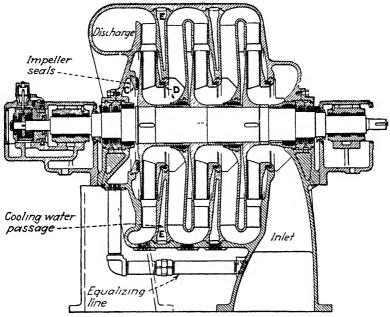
Multistage water-cooled unit with balancer seal on last stage impeller. (Courtesy of De Laval Steam Turbine Co.)
